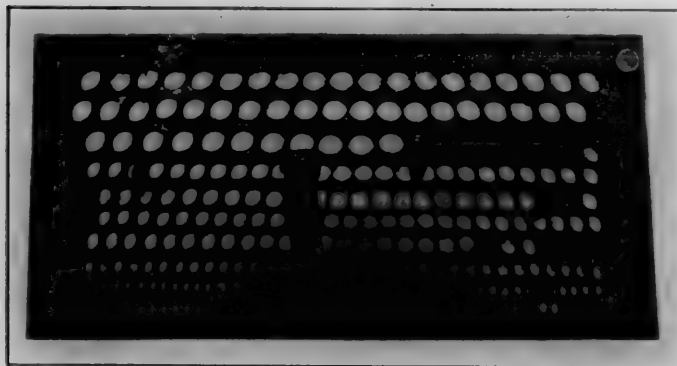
TWO $\frac{3}{8}$ -IN. PLATES BOLTED TOGETHER AND HOLES DRILLED AS PER ABOVE TABLE.
